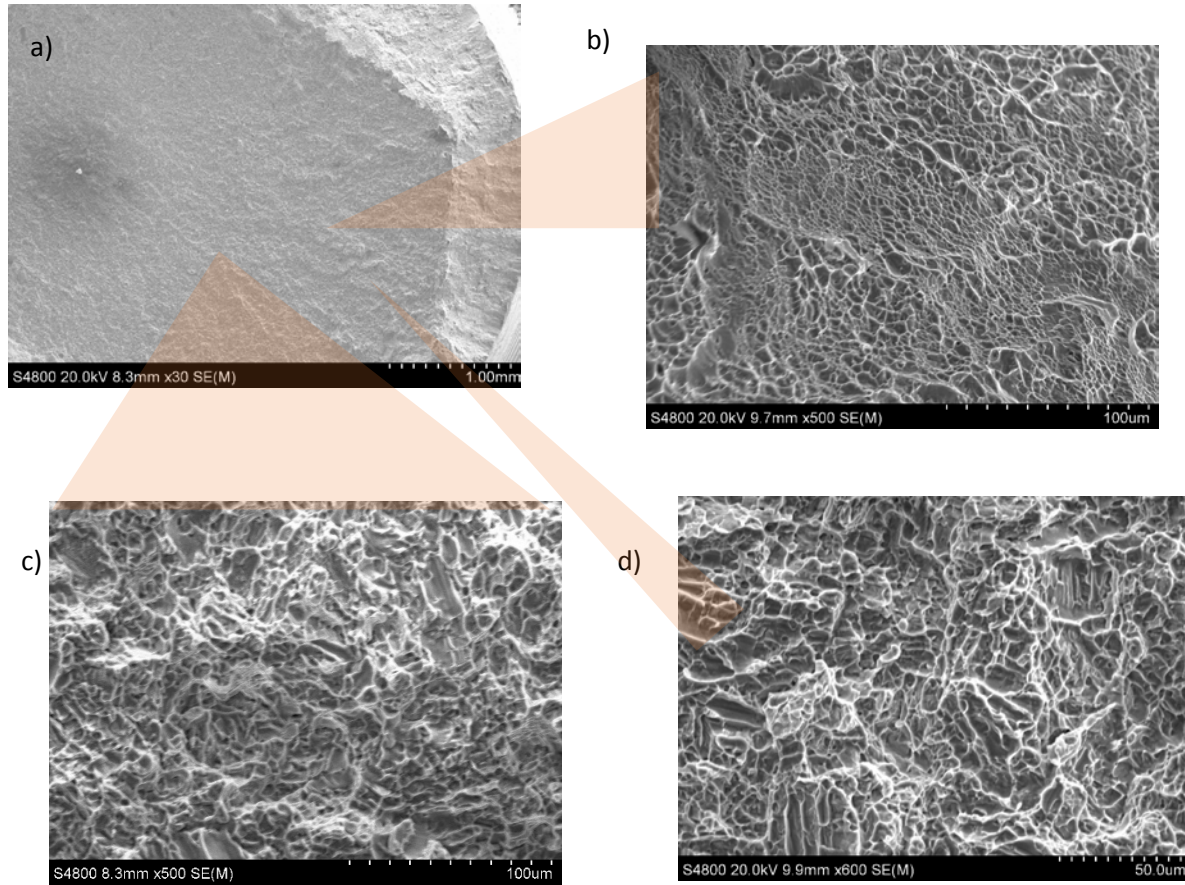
a) Low magnification SEM image of fracture surface observed in all builds. a) standard build fracture surface c) build with 5 mm neighboring cylinder fracture surface e) build with 10 mm neighboring cylinder fracture surface
